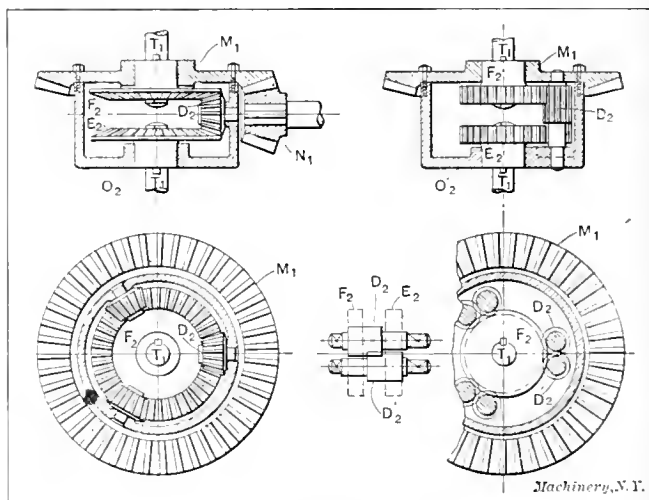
Sketch showing Principle of the Bevel and Spur Gear Types of Differential Gearing
